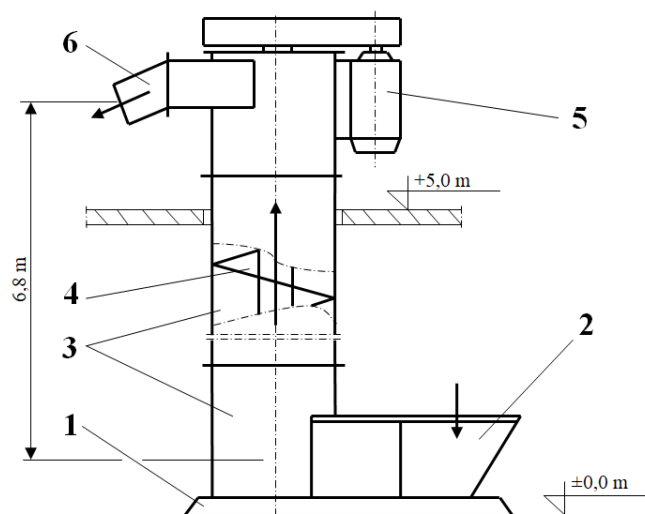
Conceptual drawing of the screw conveyor: 1 – base, 2 – feeding chamber, 3 – trough segments, 4 – screw shaft, 5 – drive unit, 6 – outlet stub
